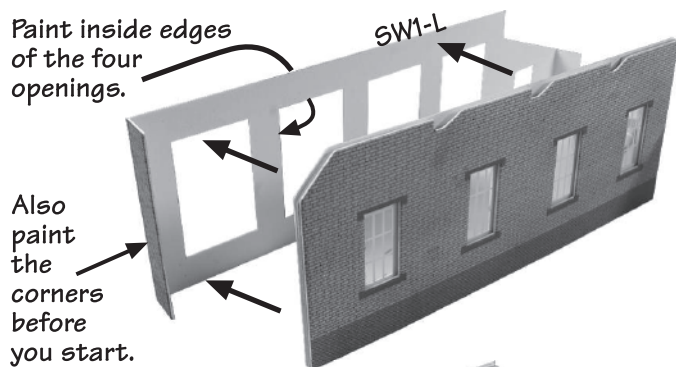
FIX SIDE WALLS TO OUTER WALLS.
